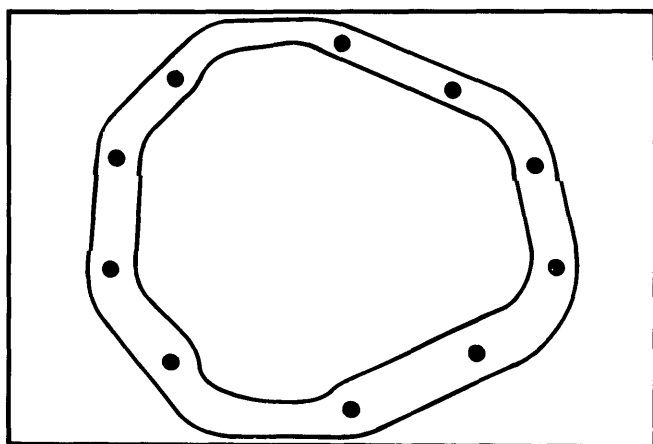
Spicer (Dana) Housing Cover Gasket for Identification Purposes
